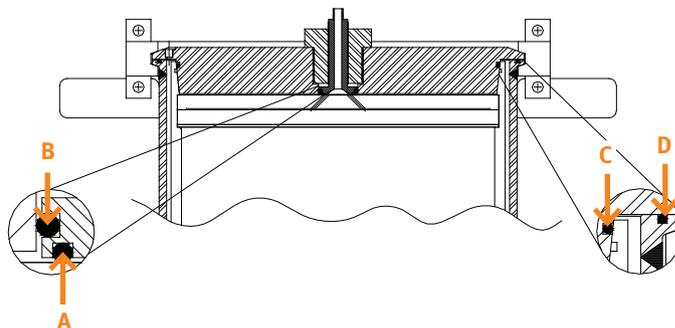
The cartridge seal O-rings (A and B), the barrel O-ring (C), and the head O-ring (D).
